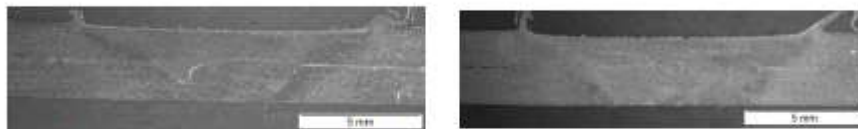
Cross sections of FSW lap joints produced under same welding parameters but different pin geometries (left-flat pin; right-threaded pin).
